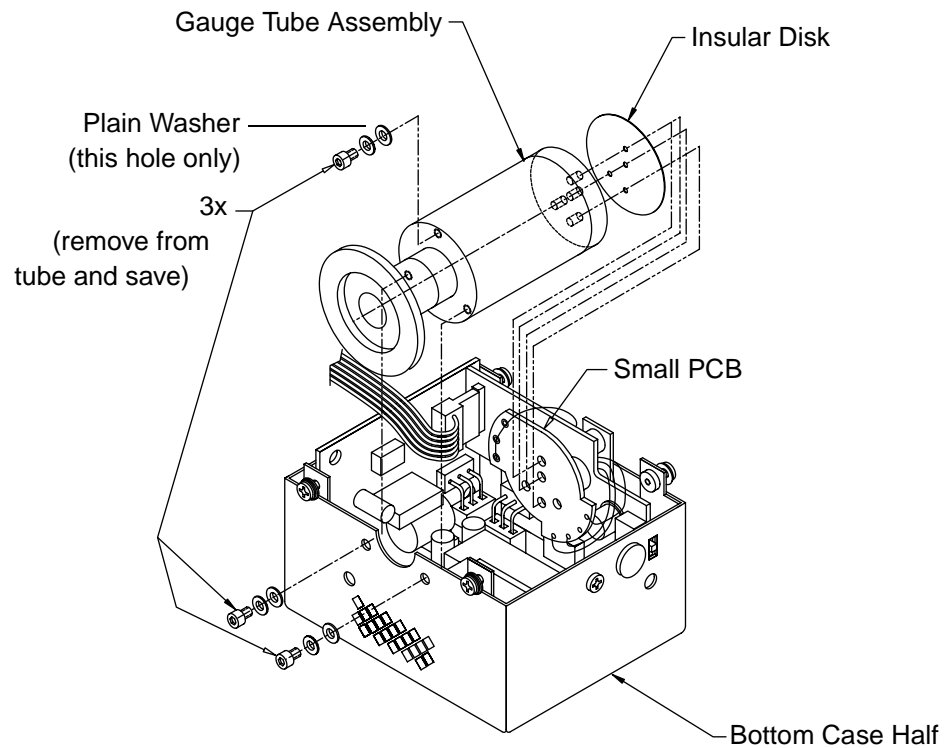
Removal of Socket Head Cap Screws and Lockwashers
